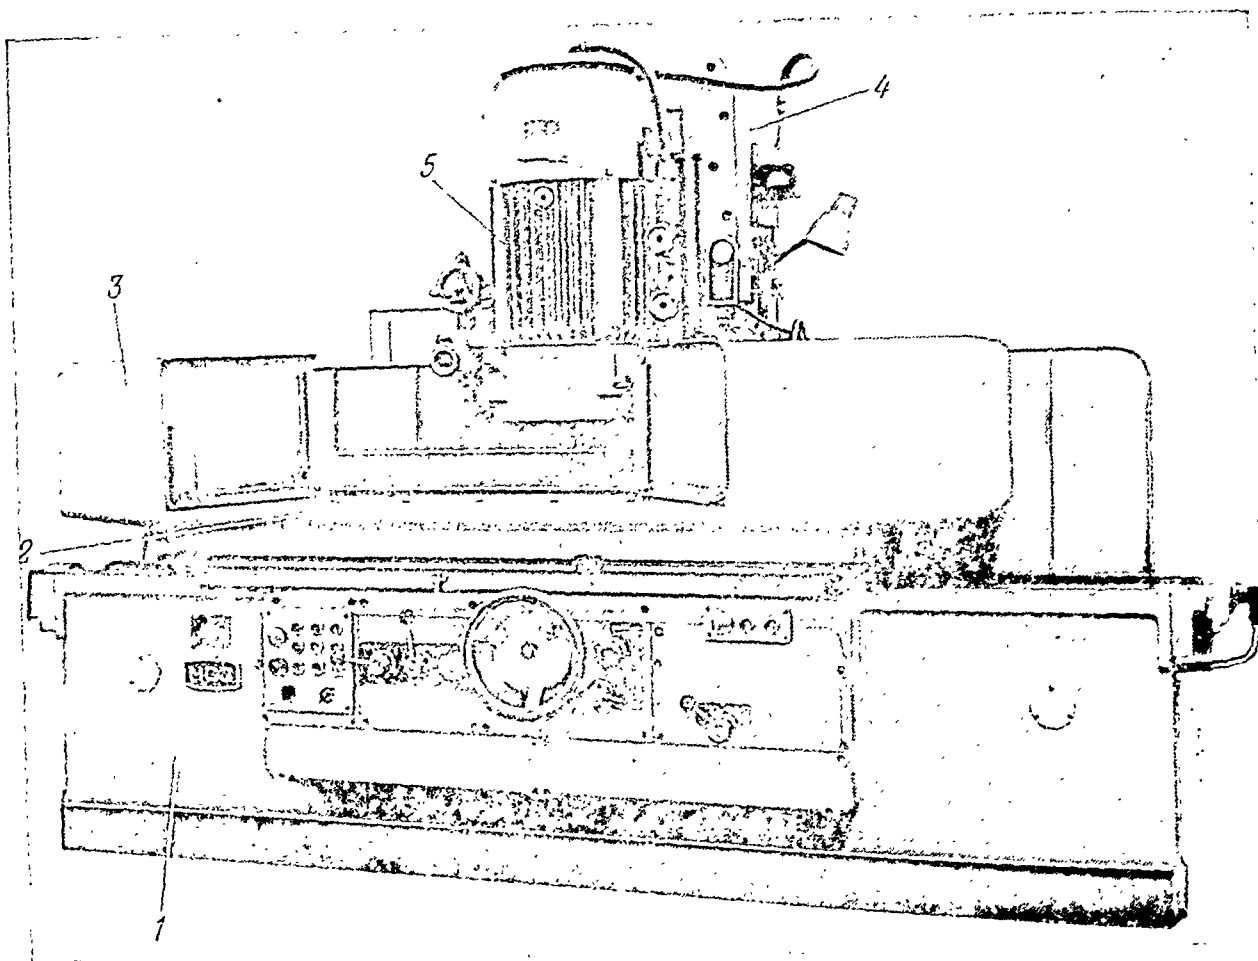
Vertical-spindle reciprocating-table surface grinder, model 3A732:
